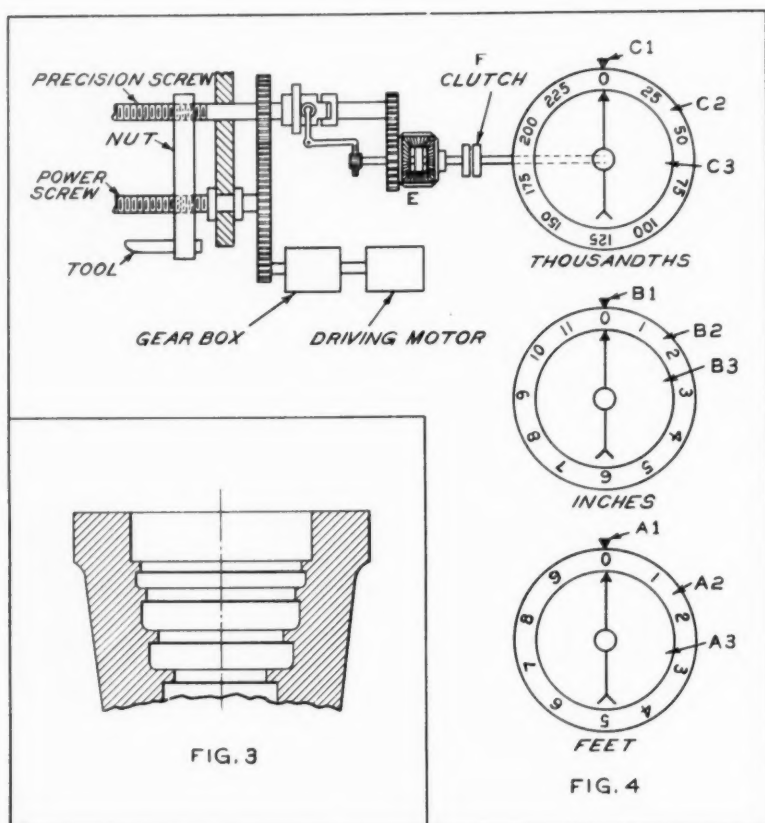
Example of Stepped Work Machined to Exceptionally Close Tolerances on the Boring Mills Shown in Figs. 1 and 2. Fig. 4. Elementary Functional Diagram for Machine Shown in Fig. 2
